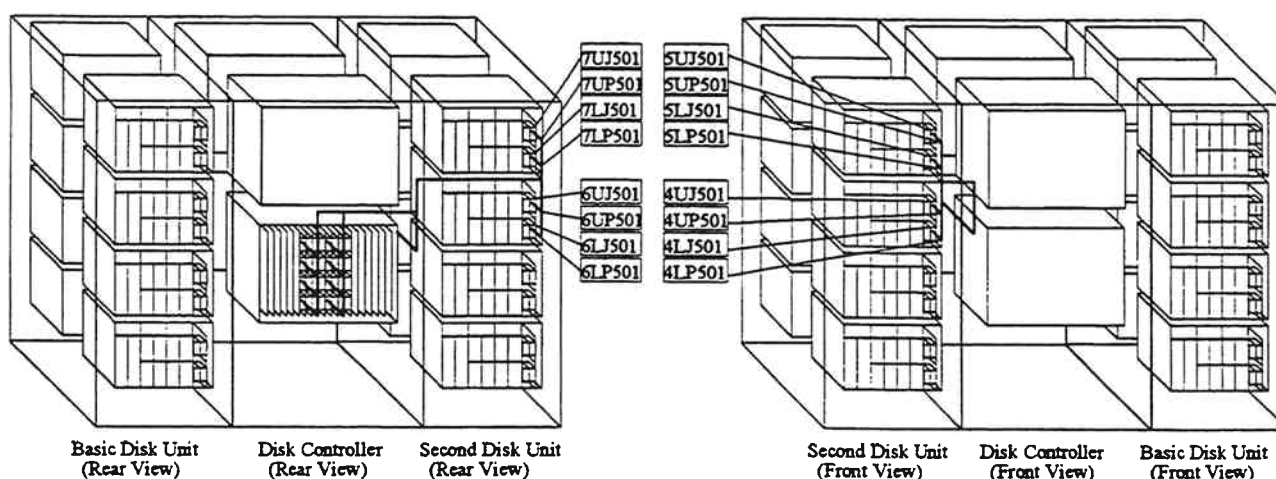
SCSI Interface Cable Disconnecting Diagram (SCSI BFR PCB Side)
